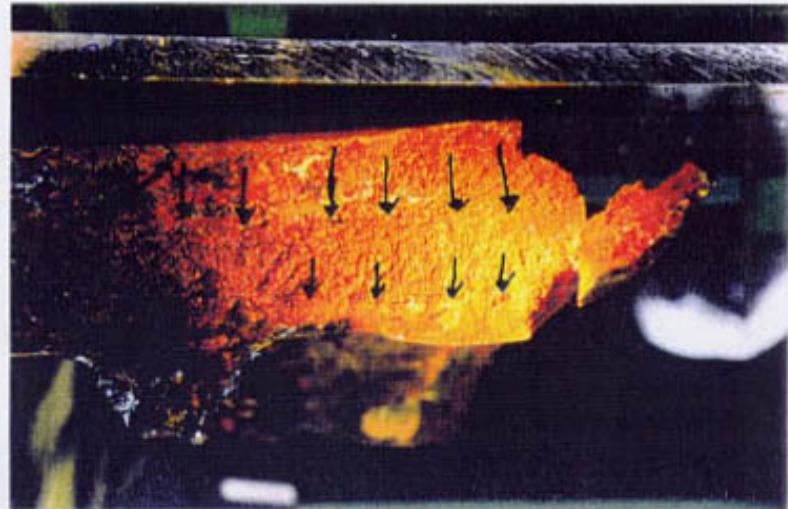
Transverse stempost crack F1 indicating penetrated blue color at crack flank
